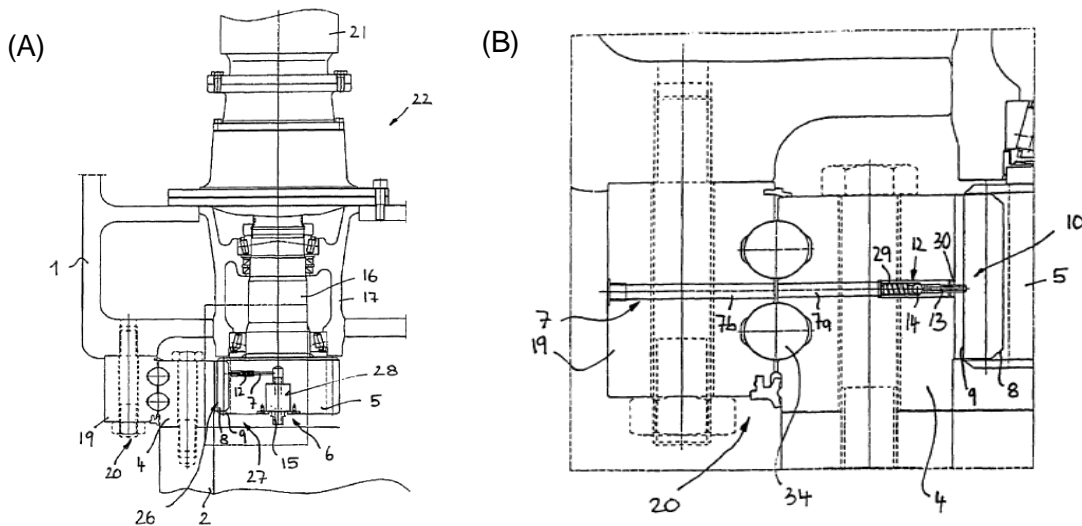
Lubricator injector. (A) Injection in the gear. (B) Injector in the bearing by Klaus [16]
